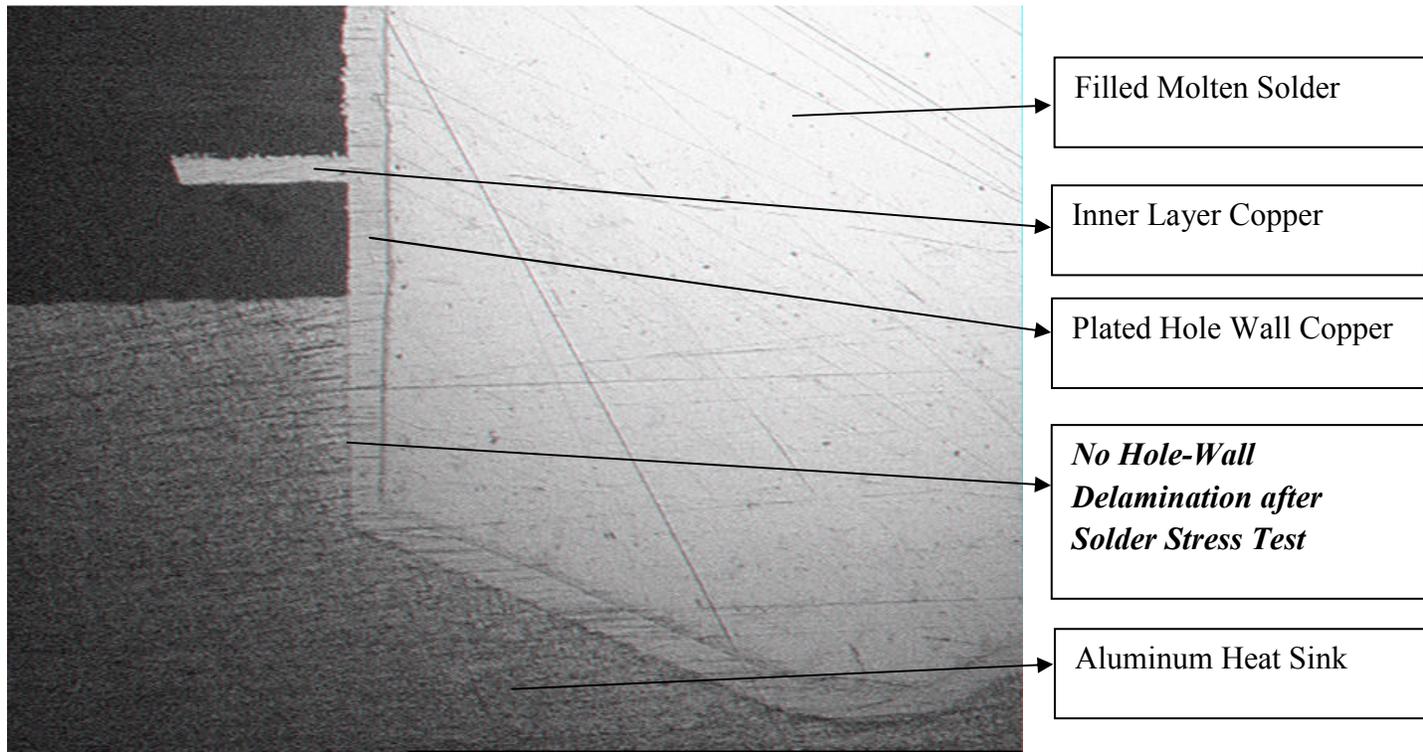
Another blown-up view of the solder stressed metalized blind hole coupon demonstrating the hole-wall integrity with the aluminum heat sink.
